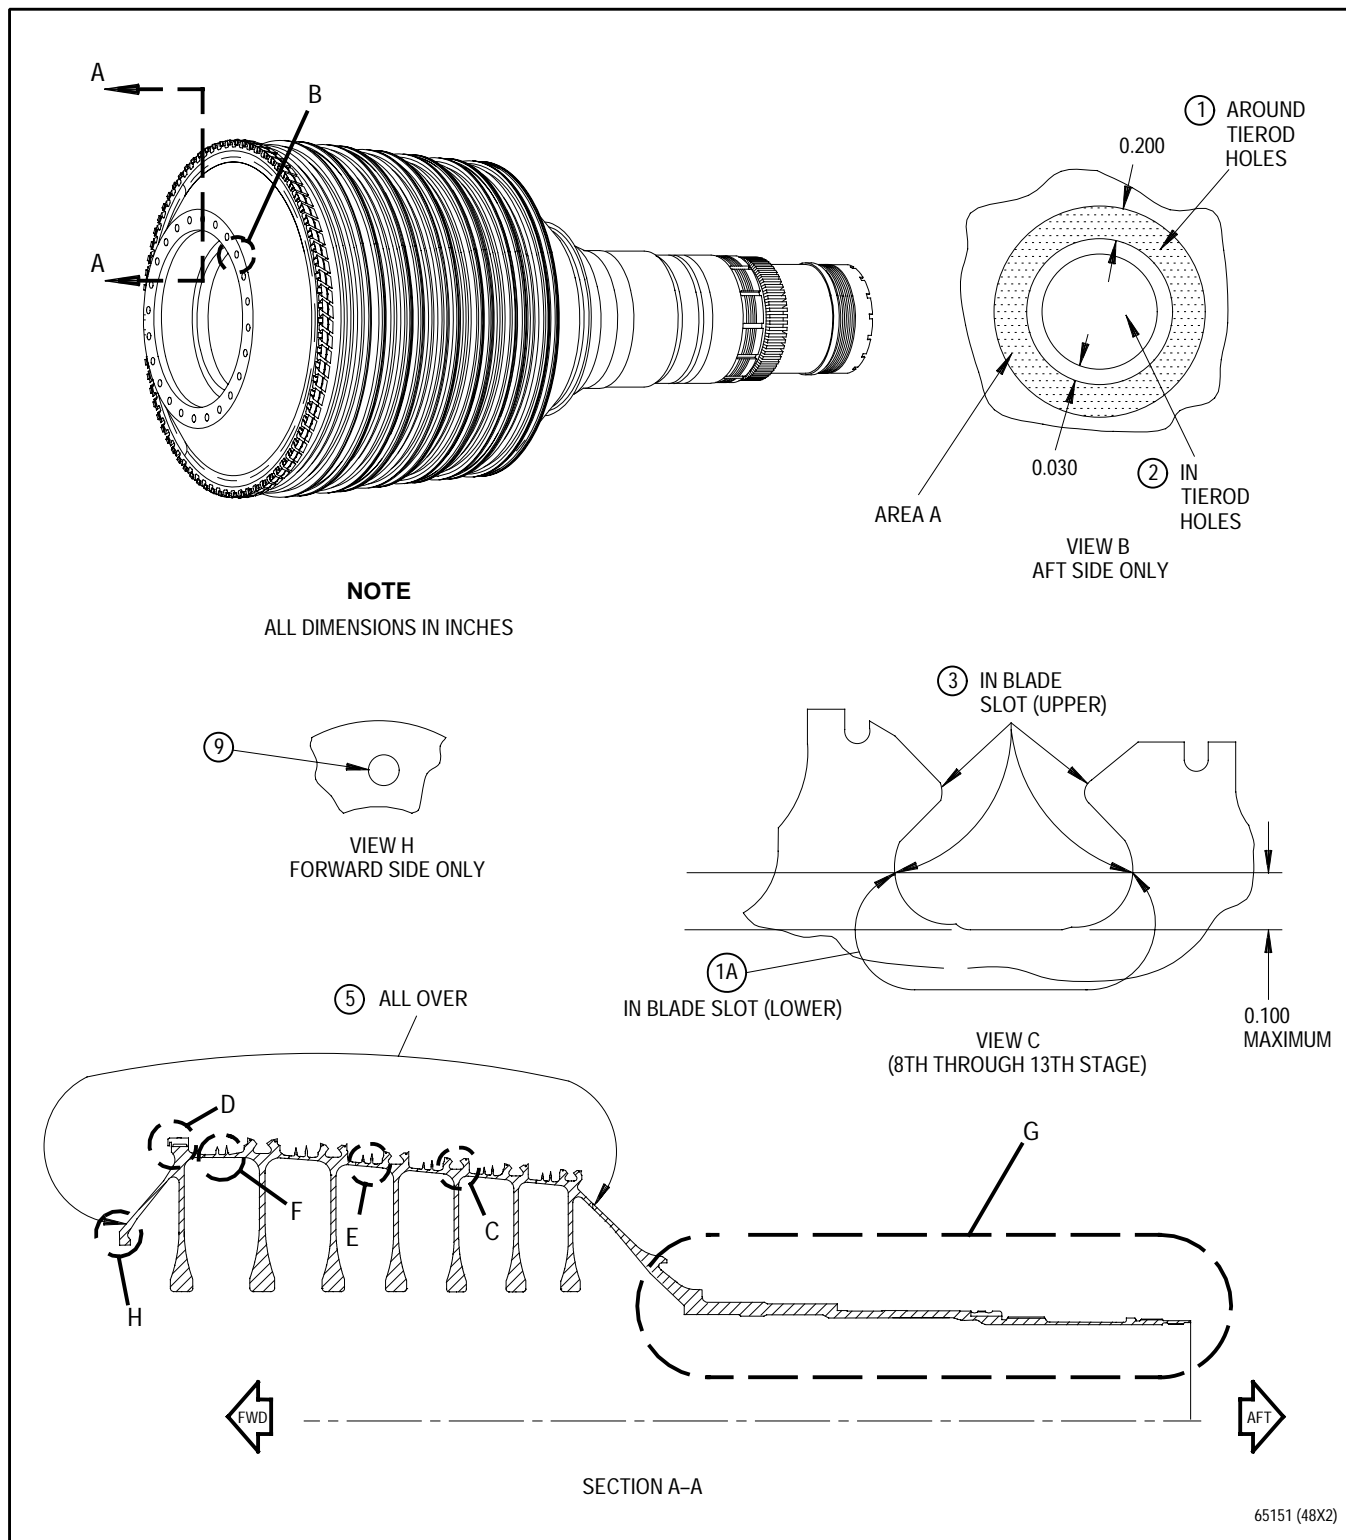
Disk-Drum Rotor, Rear Compressor, Rear, Assembly - Blend Repair (Sheet 1 of 6)
